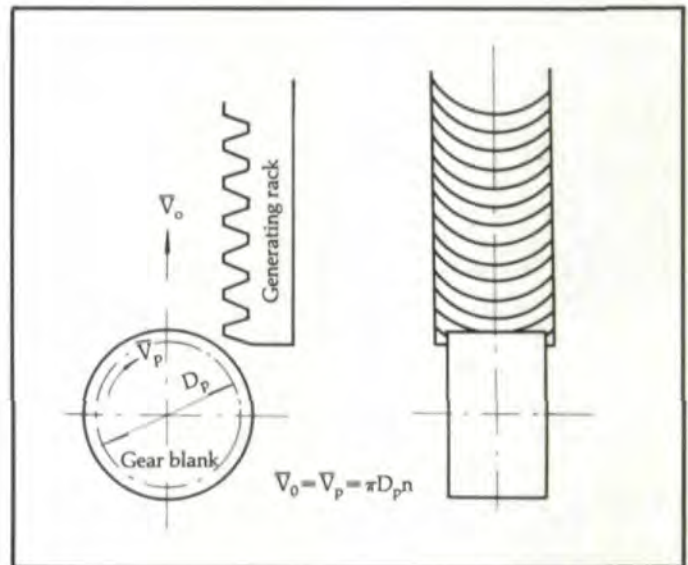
The generating principle of a curvilinear tooth cylindrical gear.
